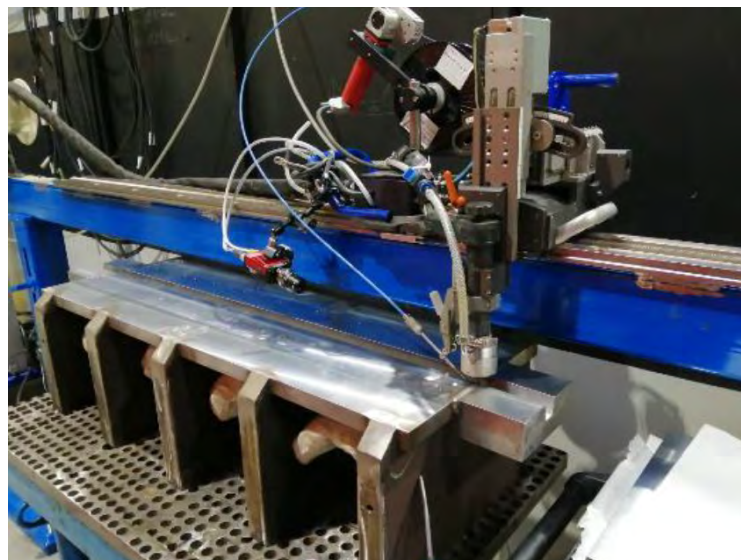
TIG welding of a Test Mock-up for Filler material acceptance (THERMANIT MTS3)
